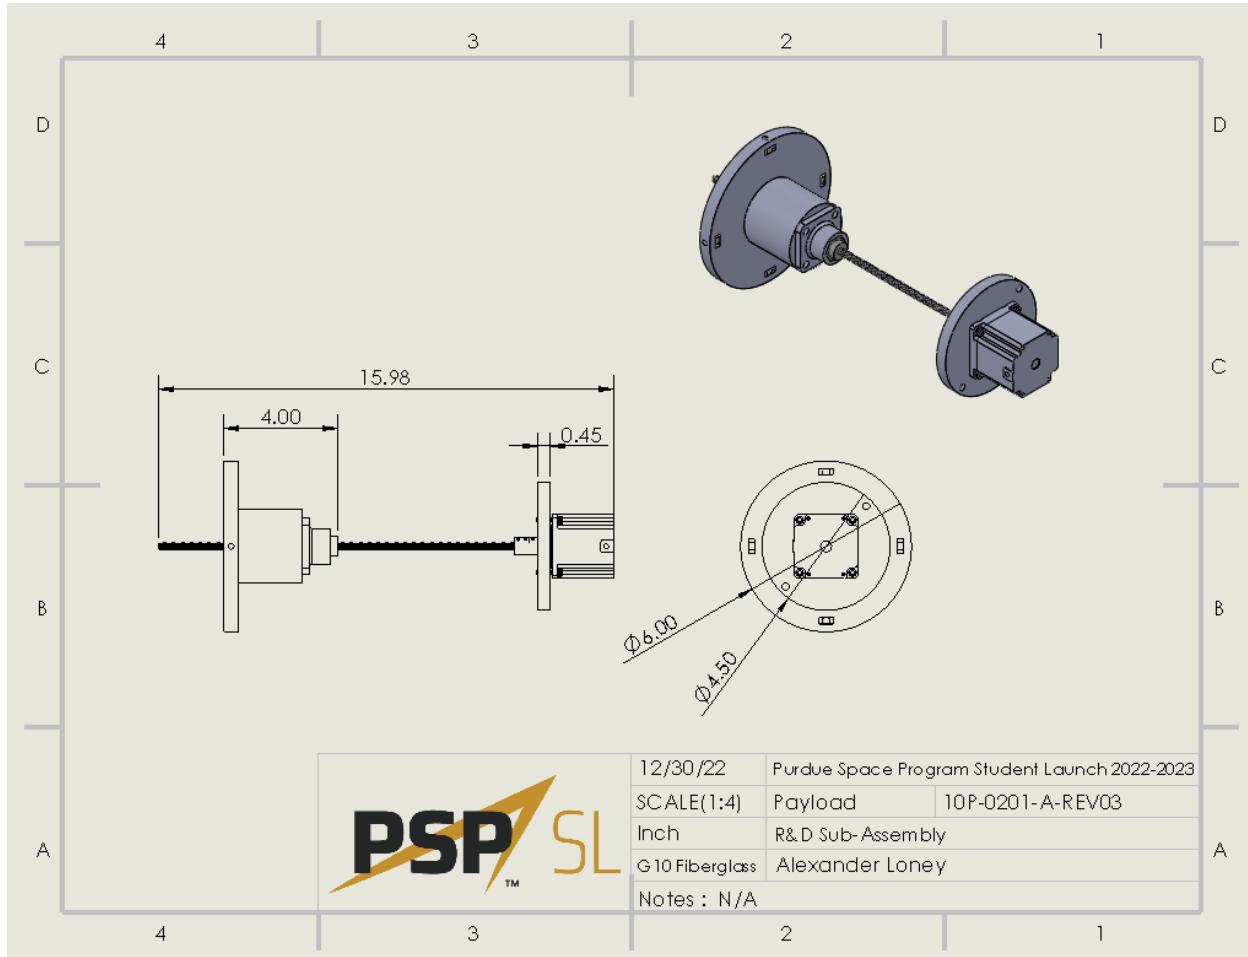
R&D Sub-Assembly Technical Drawing
